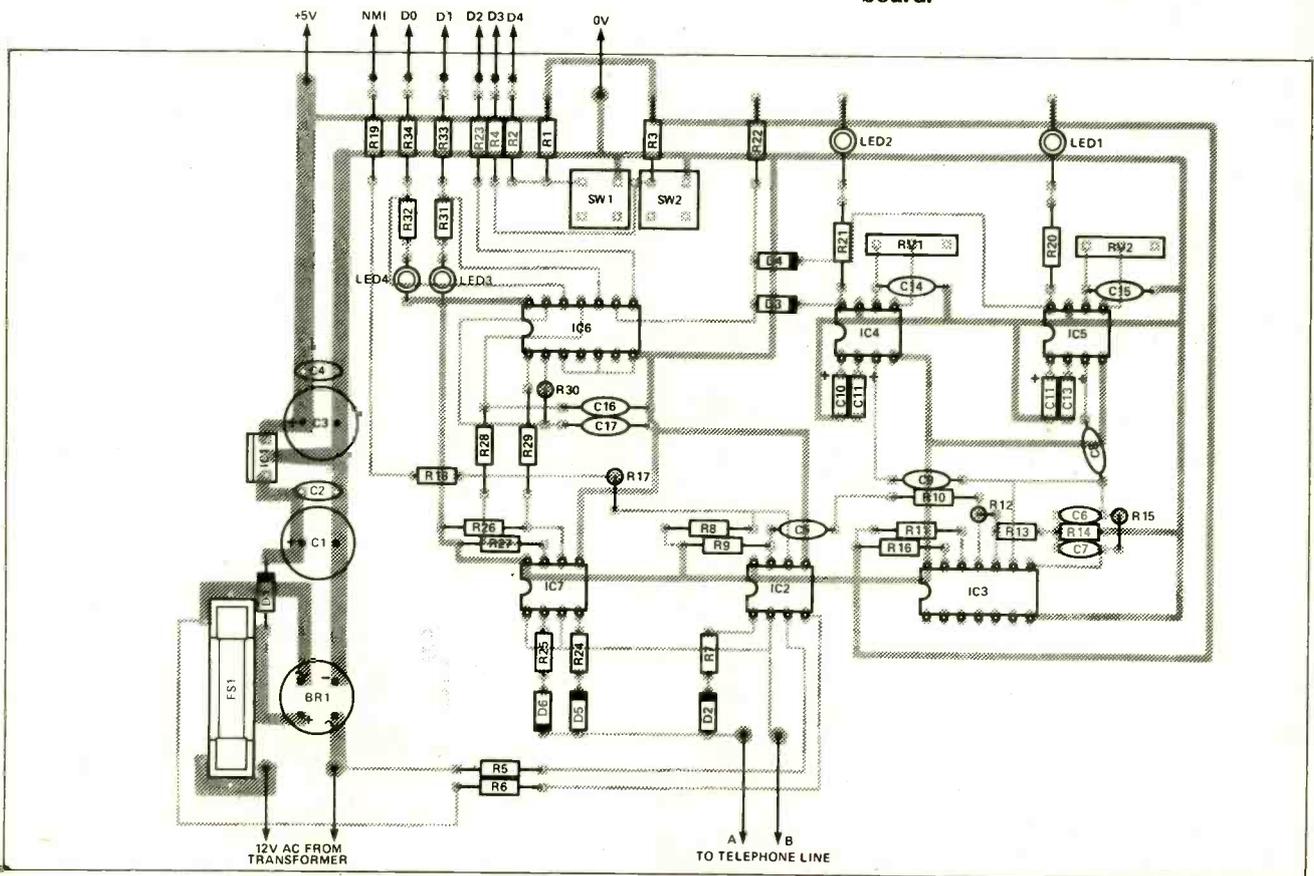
(above) Component overlay for the main PCB and Fig. 2 (below), component overlay for the power supply and interface board.
